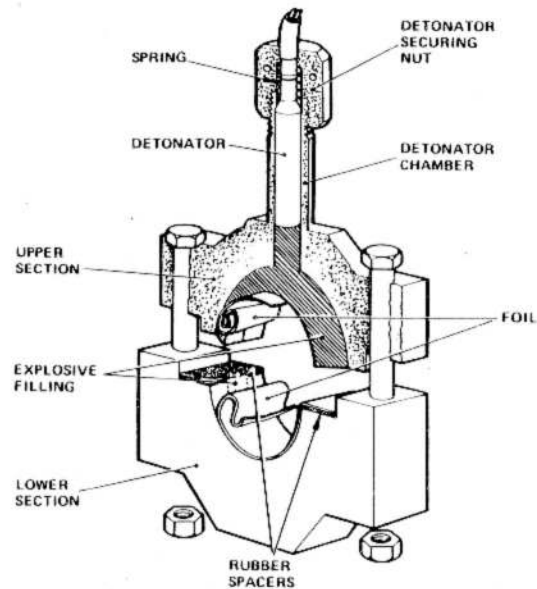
ELEVATOR CONTROL ROD SEVERANCE UNIT ASSEMBLY
